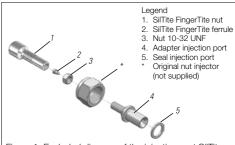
Exploded diagram of the injection port SilTite FingerTite assembly.
